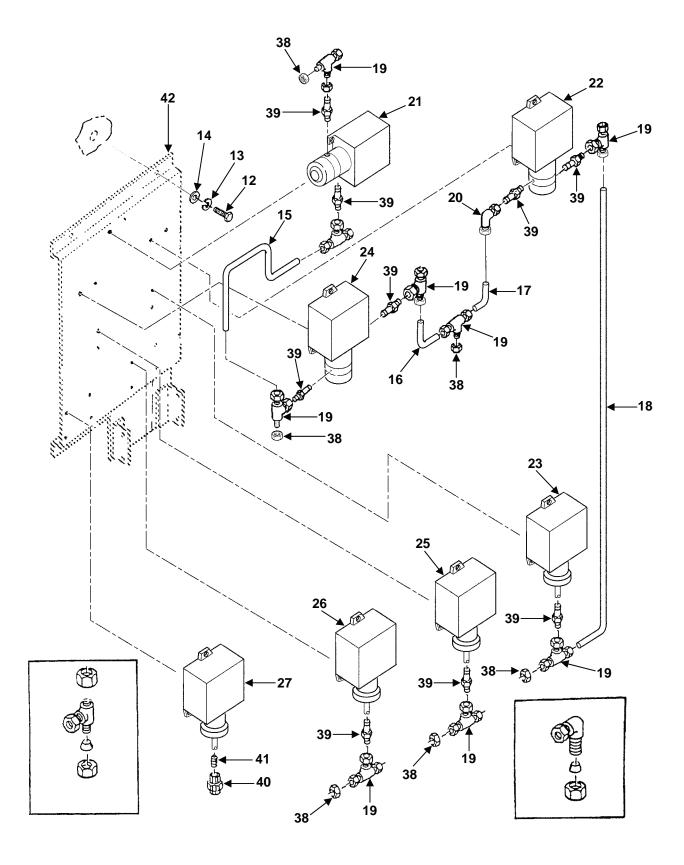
Pressure Switch Panel Assembly (Sheet 2 of 4). (Model ROWPU-1 only)
